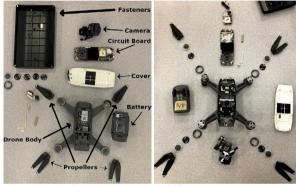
(a) The disassembled DJI Spark drone and key components; (b) DJI Spark disassembly with exploded view.
